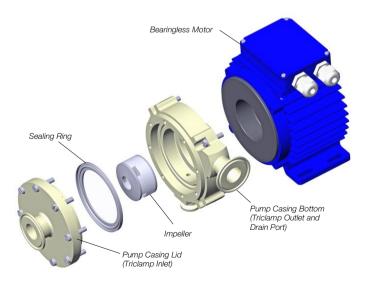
Disassembled multi-use pump head (LPP-600.7)
